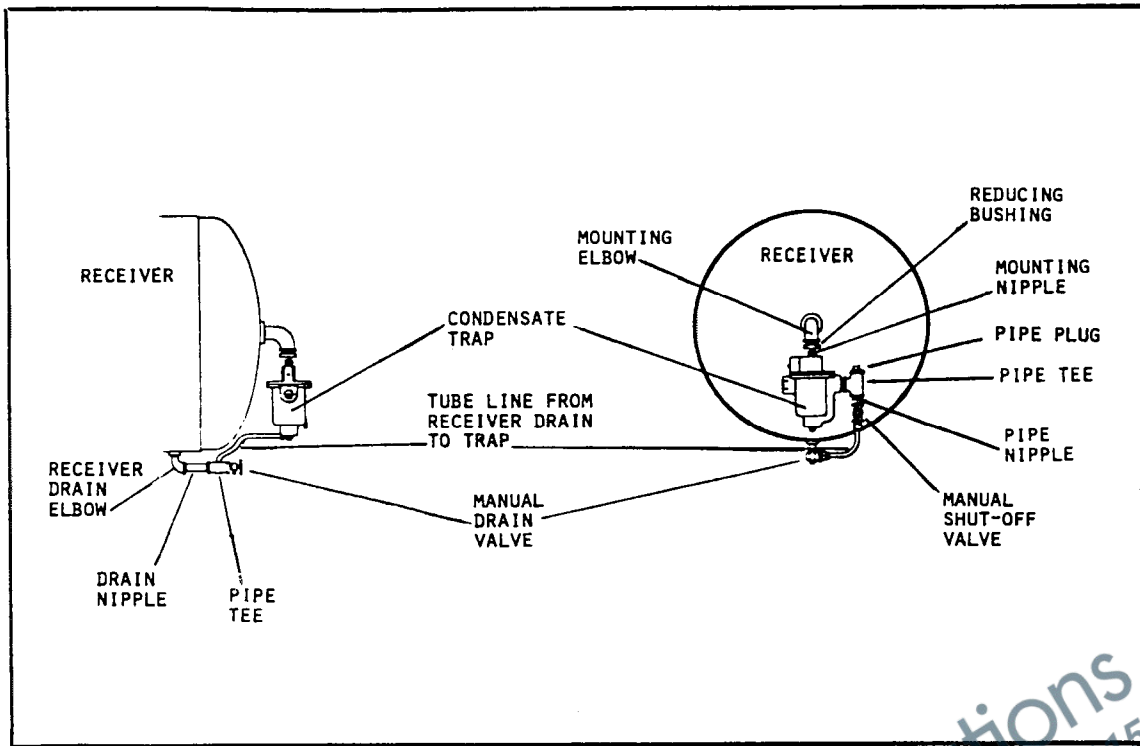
Typical Mounting and Piping Arrangement for Automatic Condensate Trap.
